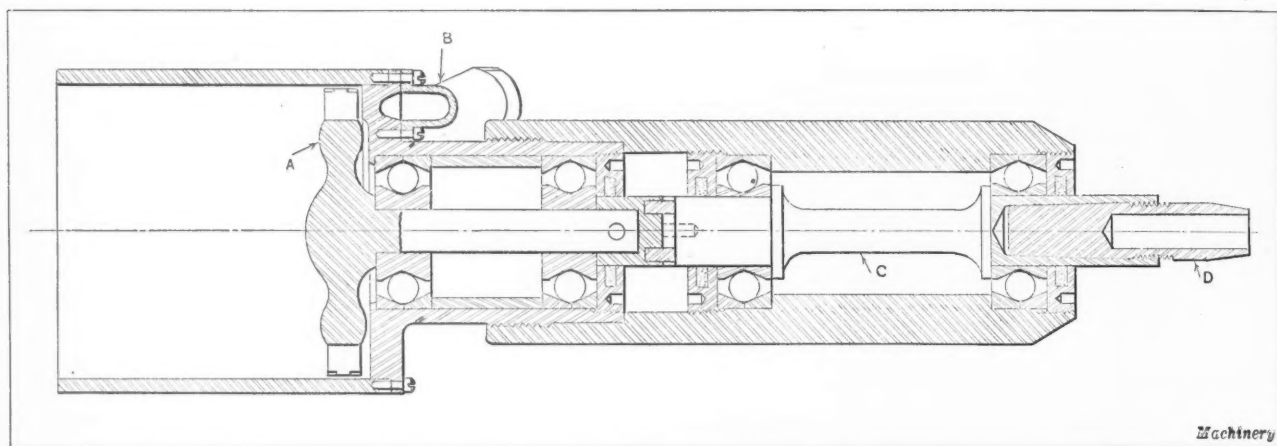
Air-driven High-speed Grinding Spindle made by the Ex-Cell-O Tool & Mfg. Co.
